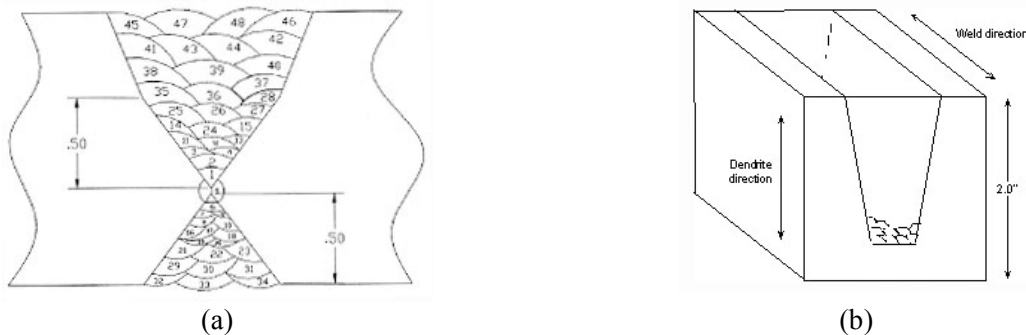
Schematic of the weld joint design and weld passes for (a) Alloy 182 SMA double-J weld and (b) the deep-groove weld (dimensions are in inches).
